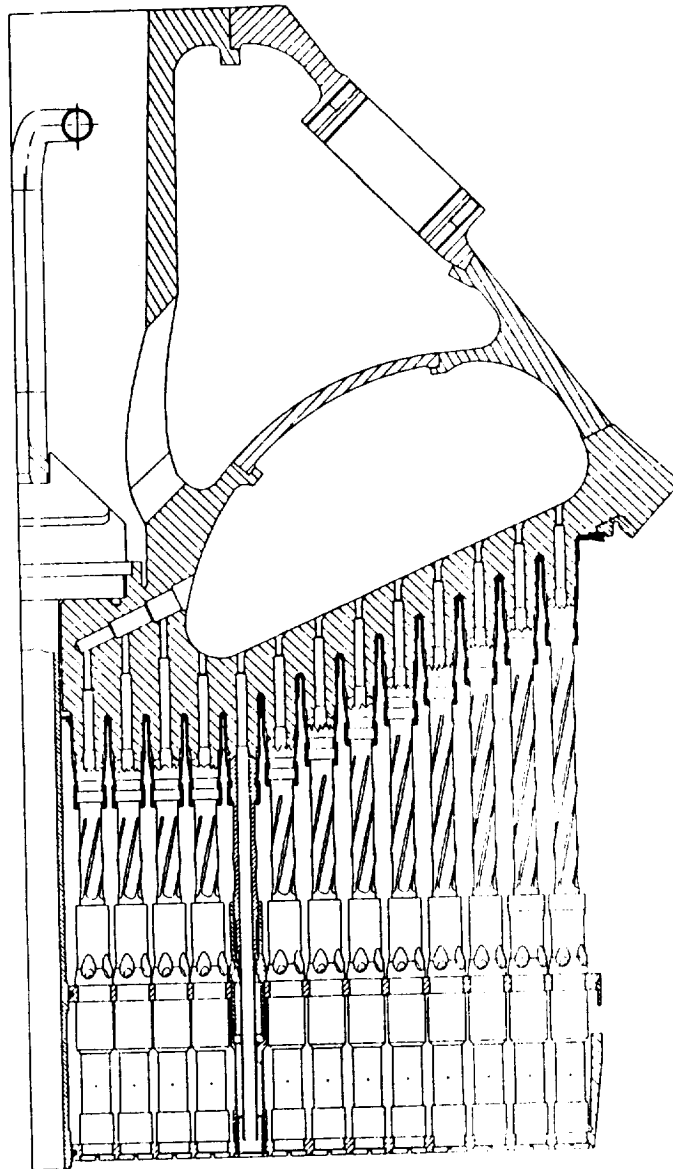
shows a conventional coaxial element injector design with 600 elements. The elements are partially machined, then inertia welded to a pre-machined and drilled interpropellant plate. The primary cost drivers in this construction are a variety of machining and inspection steps, which have to be performed 600 times each after the elements are in place on the injector body and the N/C machining and welding necessary to close out the LO₂ manifold and thrust structure.
